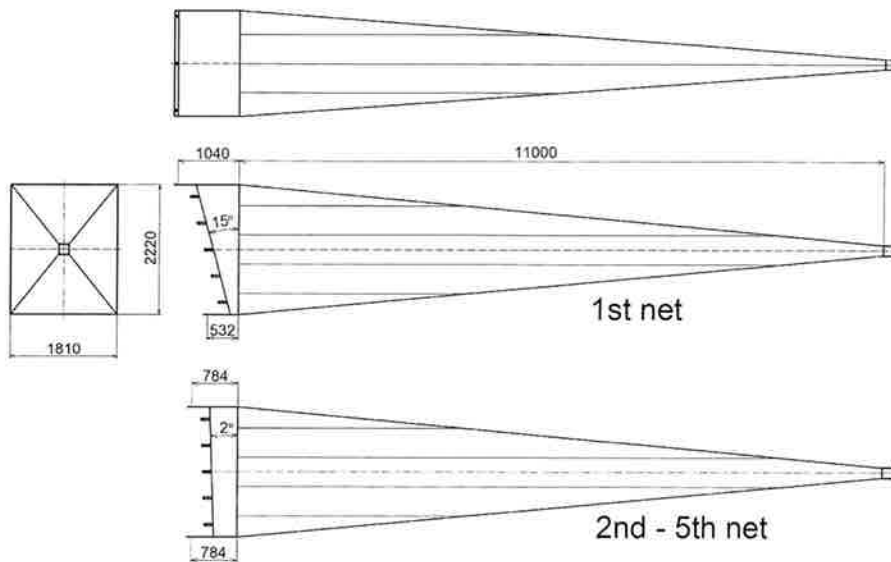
Profile of the net arrangement for a large-scale prototype.
